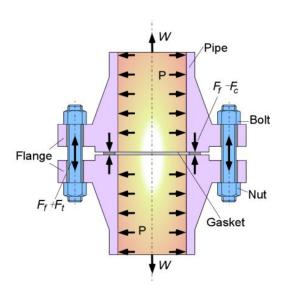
A pipe flange connection with spiral wound gasket subjected to internal pressure under elevated temperature
